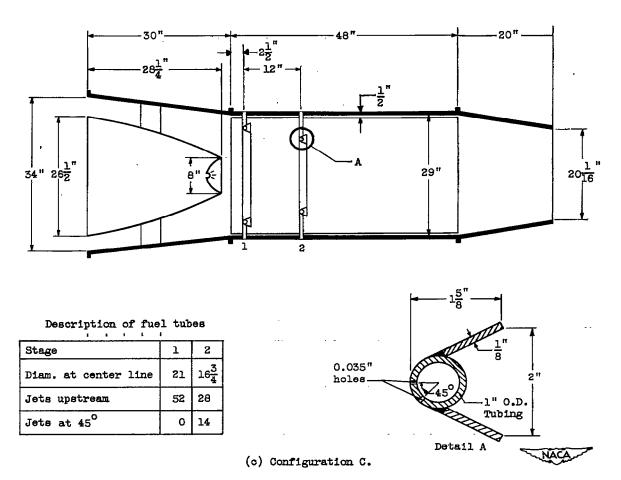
Continued. Diagrammatic sketches of tail-pipe-burner assembly.
